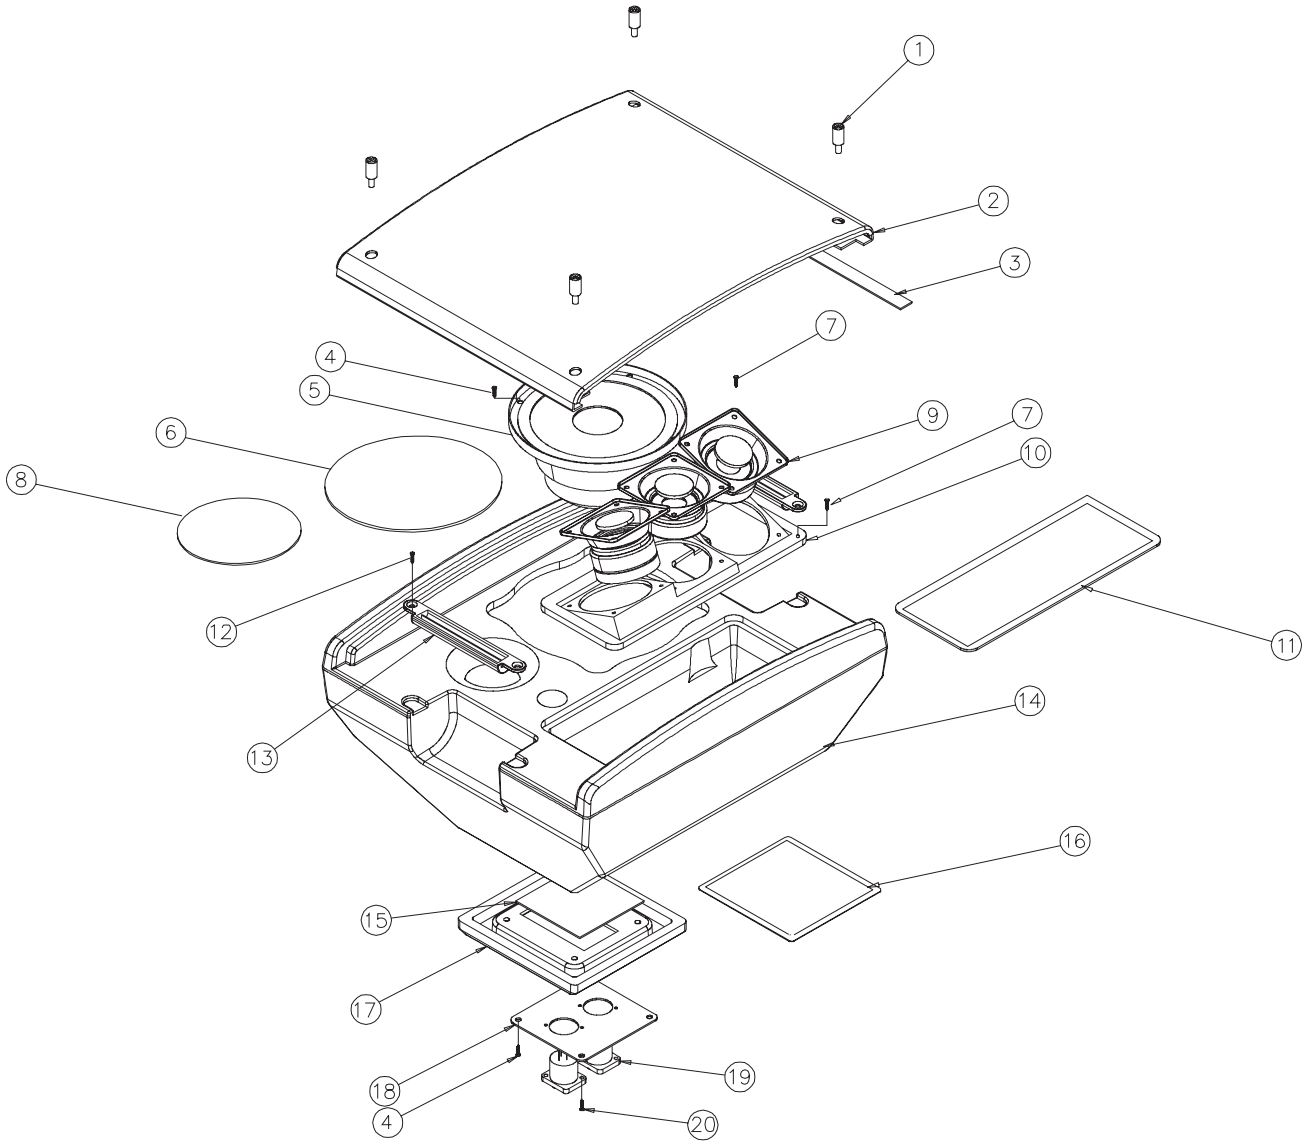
Panaray Model 620M Loudspeaker Packaging View
